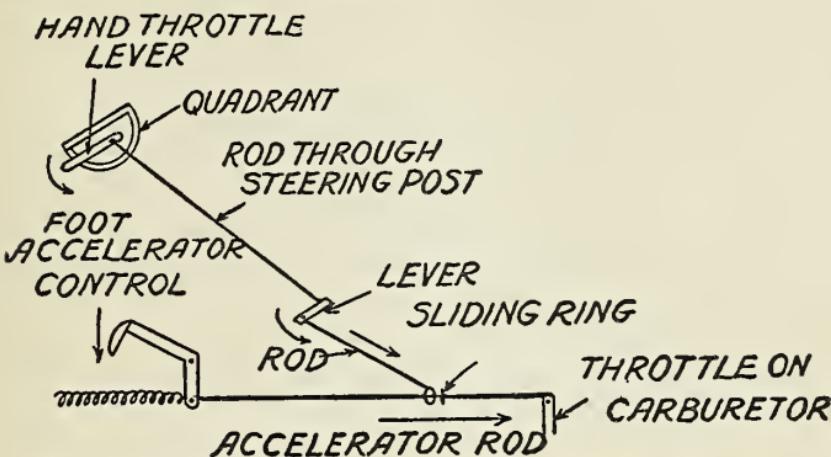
Throttle lever and accelerator controls of carburetor.
